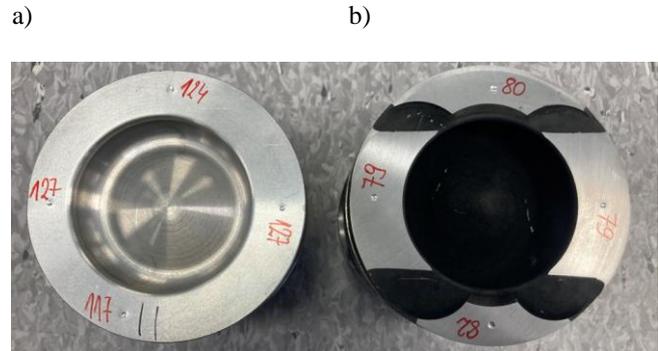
Hardness measurement of the piston crown: a) new piston, b) used piston
